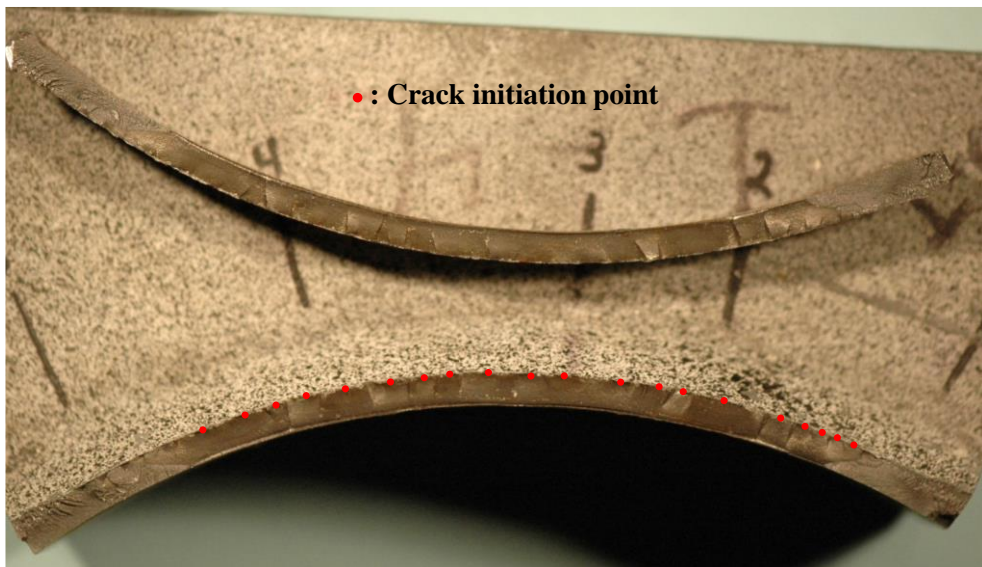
Fatigue fracture surface and identified crack initiation points in Type I-4 Arm
